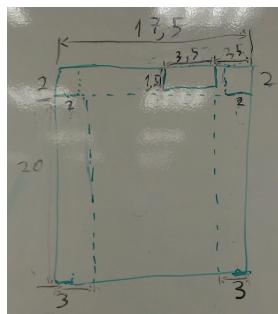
Drawing of the gutter (cuts marked by a solid line and bends marked by the dashed line)
